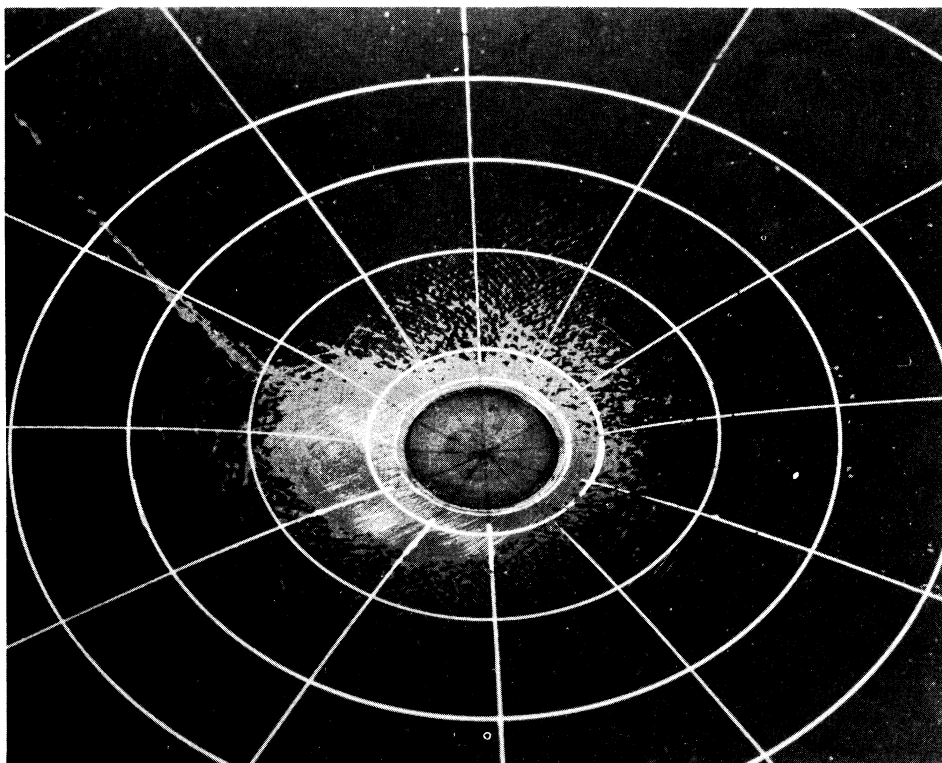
Oblique view of herring-bone crack pattern in mill scale around dimple at plate center.
